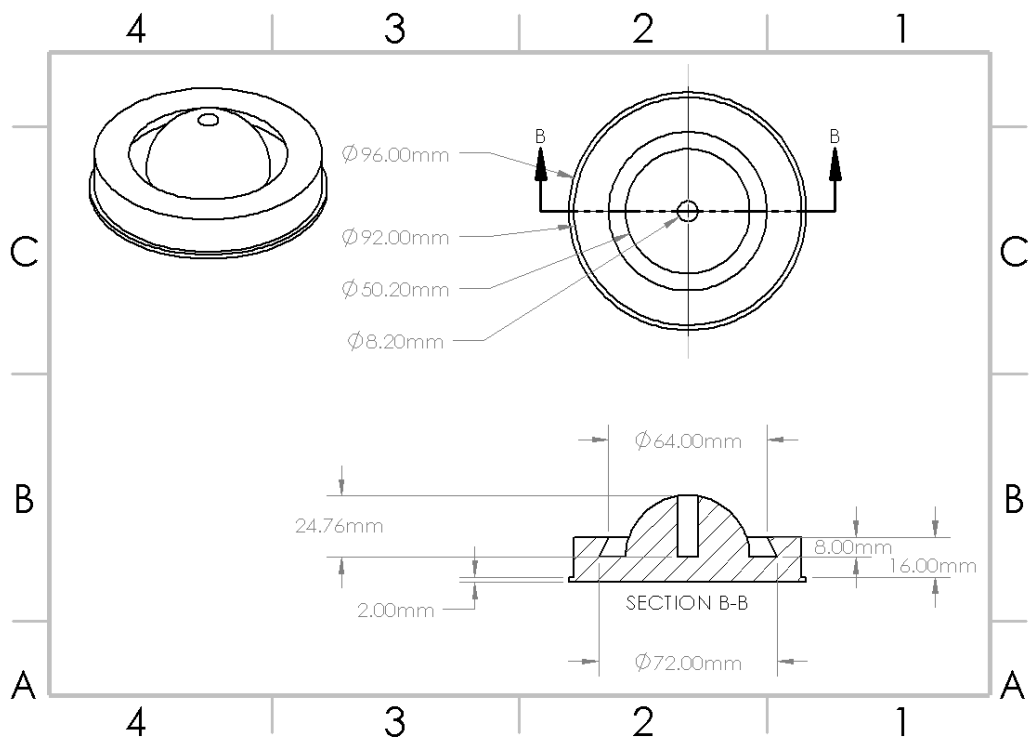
Technical drawing of the upper half mold negative used to create the upper silicone mold.
